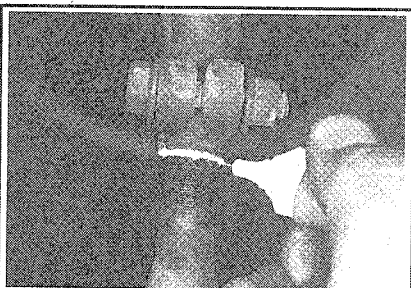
Mark the tie rod end before removal to ensure reinstallation as close as possible to the previous alignment position
